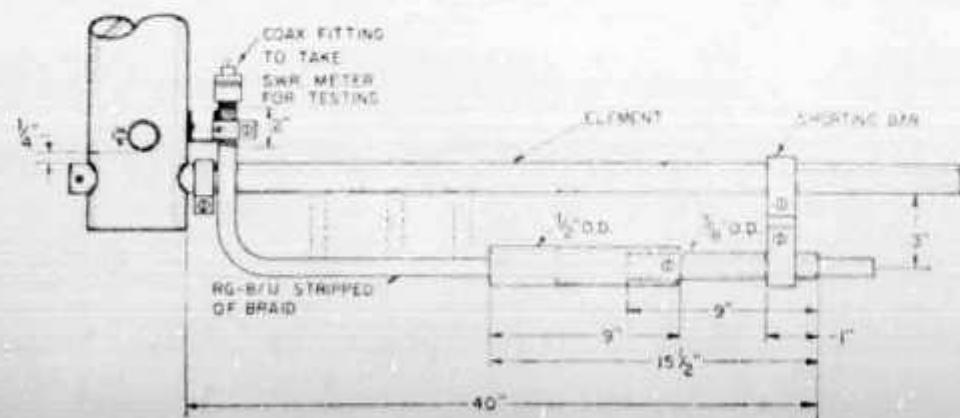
Here are the details on the gamma-matching section. As mentioned in the text, the coax fitting can be a female type, SO-239, mounted on a small bracket which is mounted on the boom. Spacing insulators for spacing the gamma line from the element can be made up from pieces of Lucite or Plexiglass.
